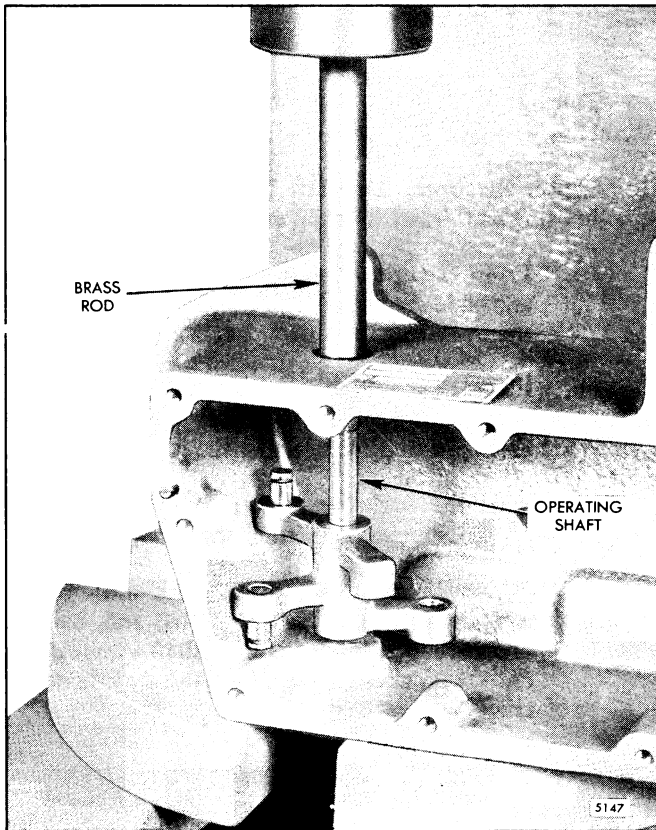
Removing Operating Lever Shafts and Enclosed Bearing Assemblies
